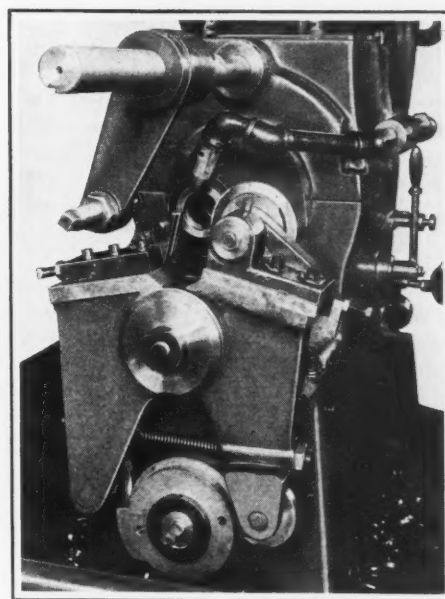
A Roller Cutter Completes the Operation on Pipe Nipples
